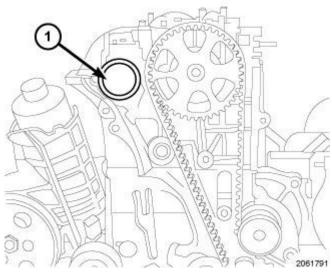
EXHAUST CAMSHAFT OIL SEAL Courtesy of CHRYSLER LLC
